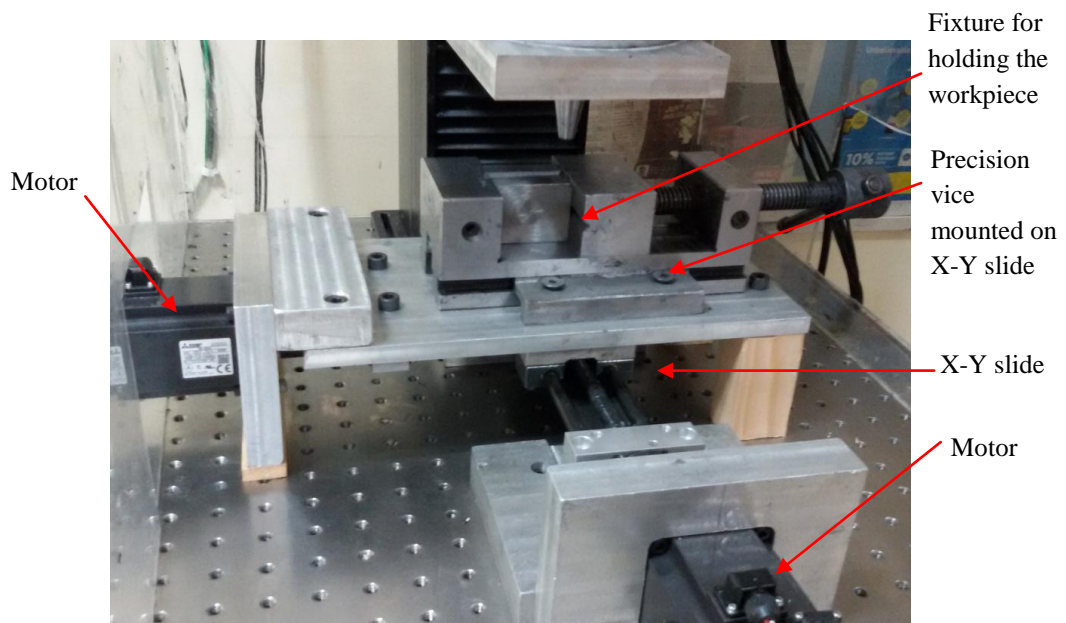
Arrangement for holding and moving the workpiece in X and Y axis
